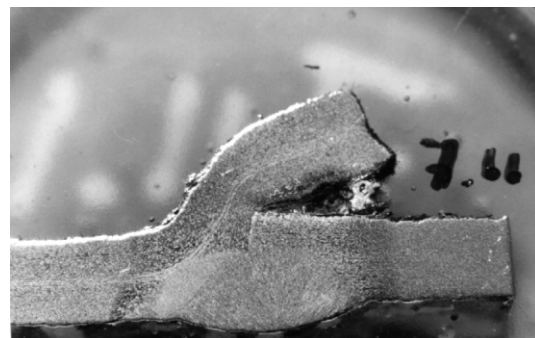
A circumferential weld with really dangerous defects. Not well formed backing strip. Plate thickness: 2.8 mm.
